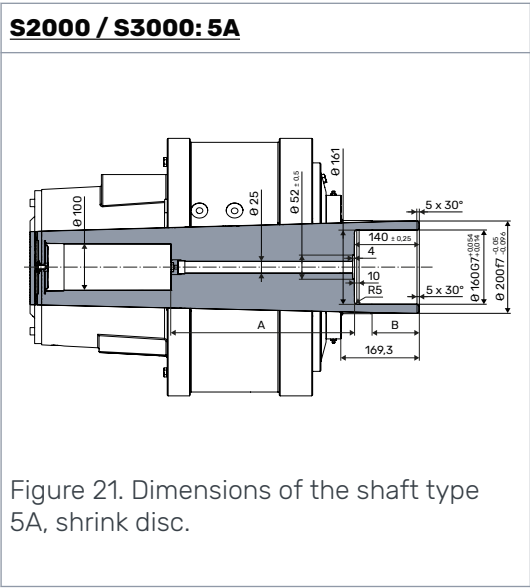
Dimensions of the shaft type 5A, shrink disc.
